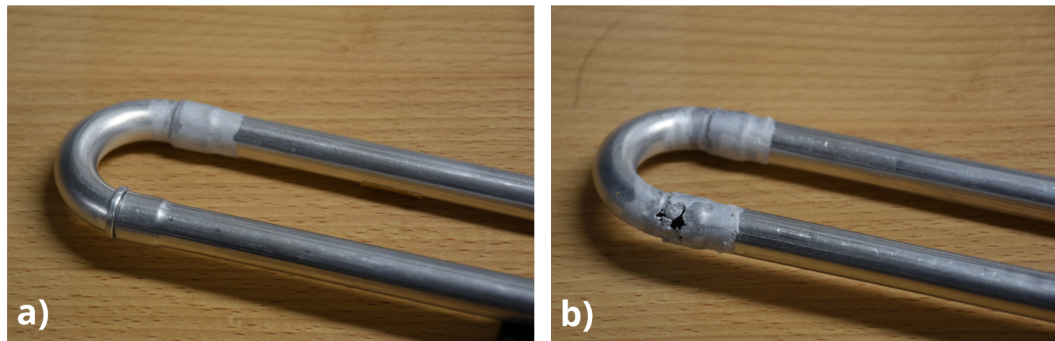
a) TIG welding and b) finished inductor
